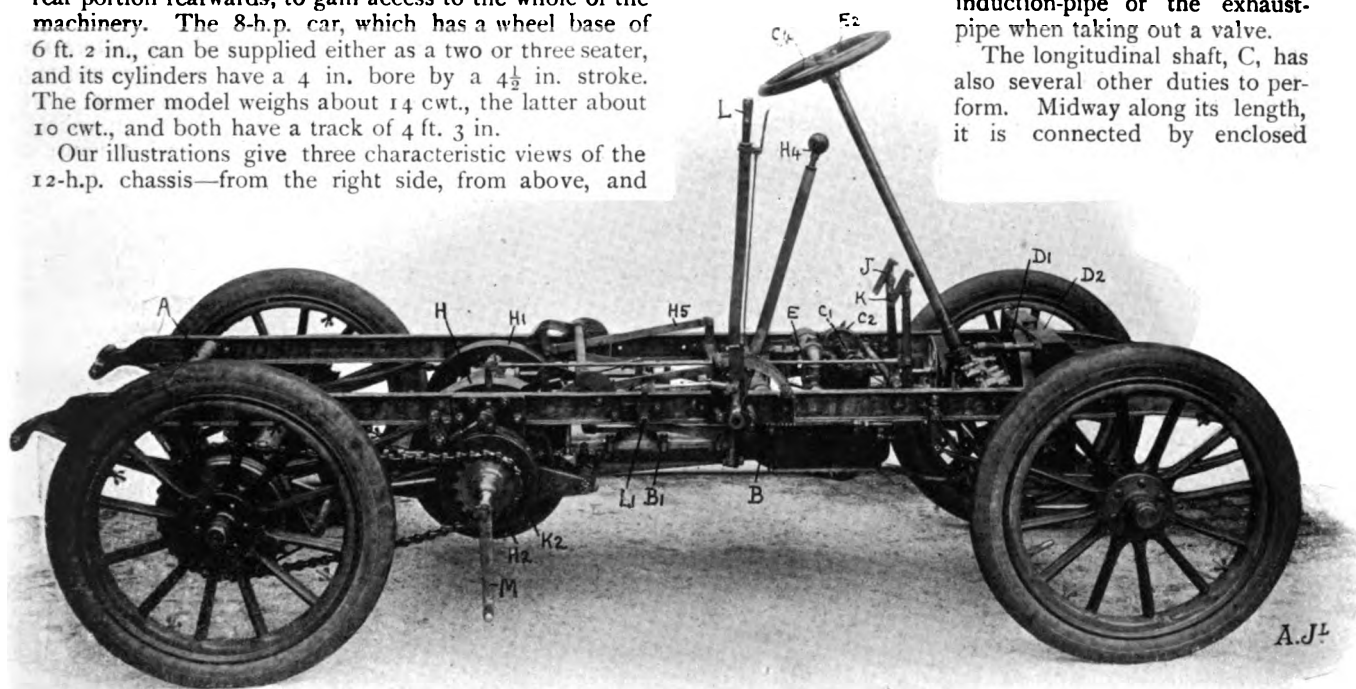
View of the 12-h.p. Singer Chassis, from the "off" side.
